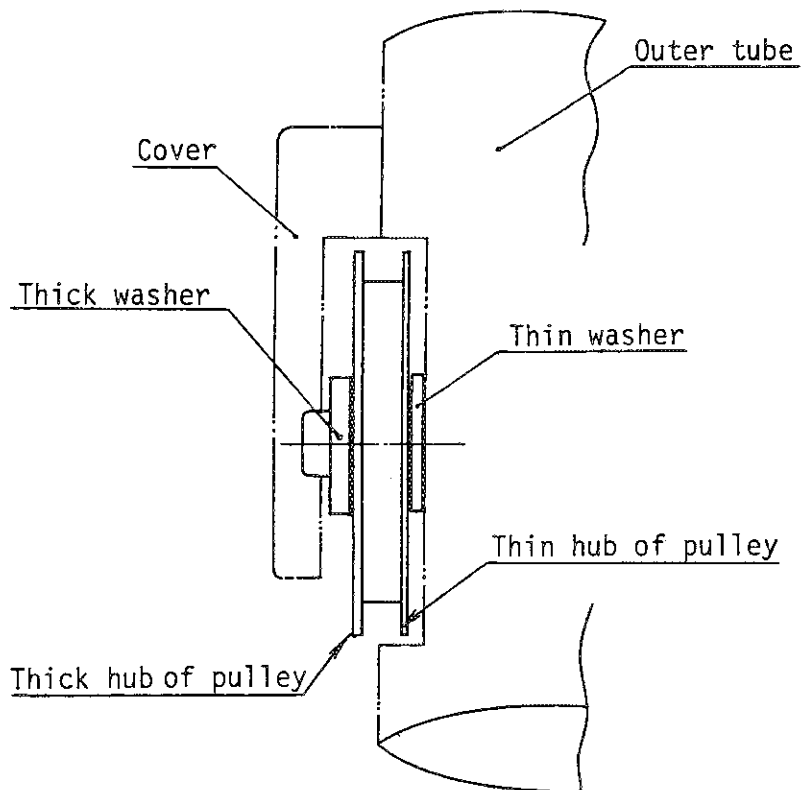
Conversion pulley for Z motion tape at outer tube lower part
